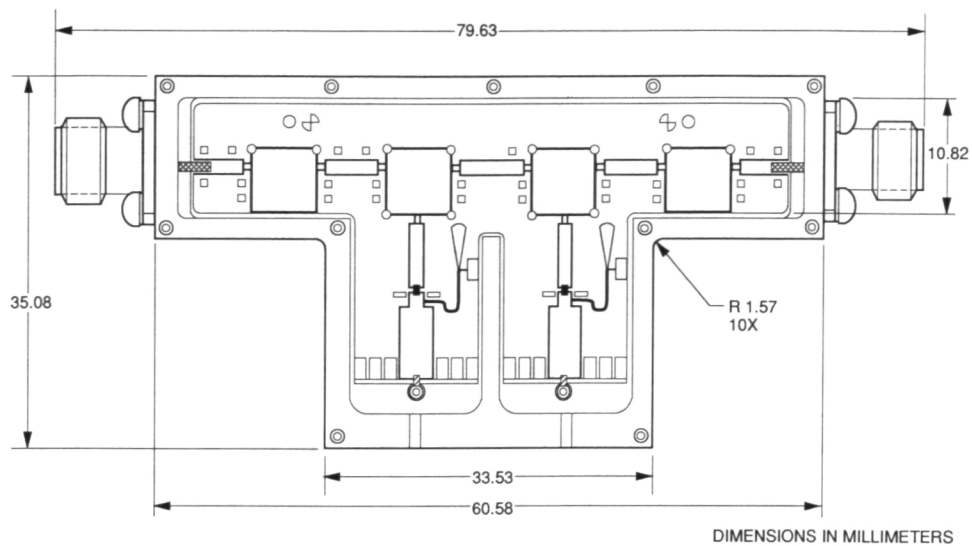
Deep Space Spacecraft Transponder phase modulator assembly.
